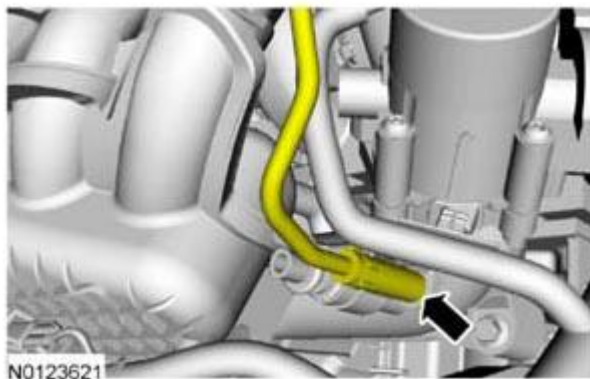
Locating EVAP Canister Purge Valve Tube From Intake Manifold
